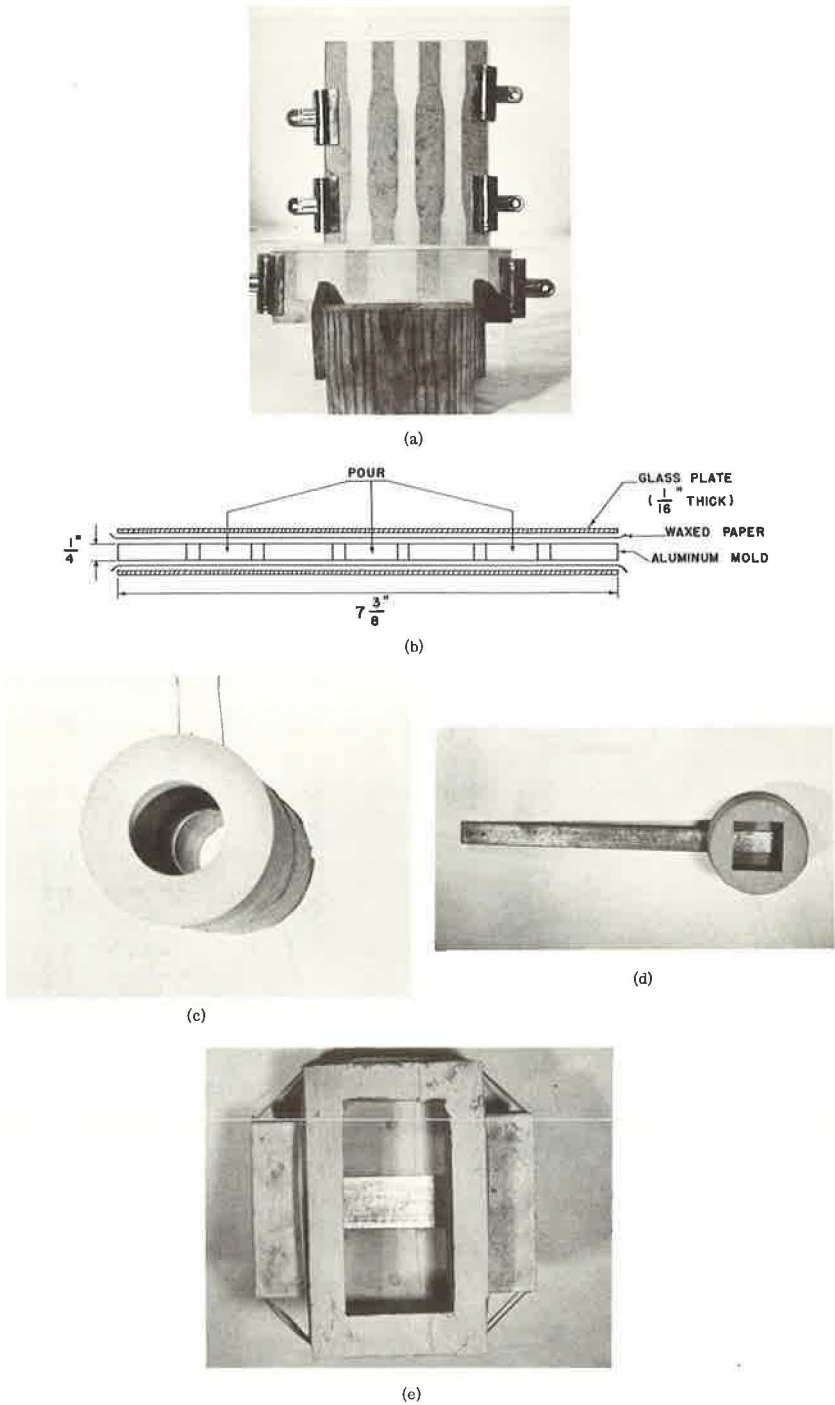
Mold types for casting specimens: (a) molds for tension and shear plastic specimens, (b) open-end view of tension specimen mold assembly, (c) silicone rubber mold for torsion specimen, (d) steel strap inserted in silicone rubber mold before casting single shear adhesion specimen, (e) steel bar inserted in silicone rubber mold before casting tension adhesion specimen.
